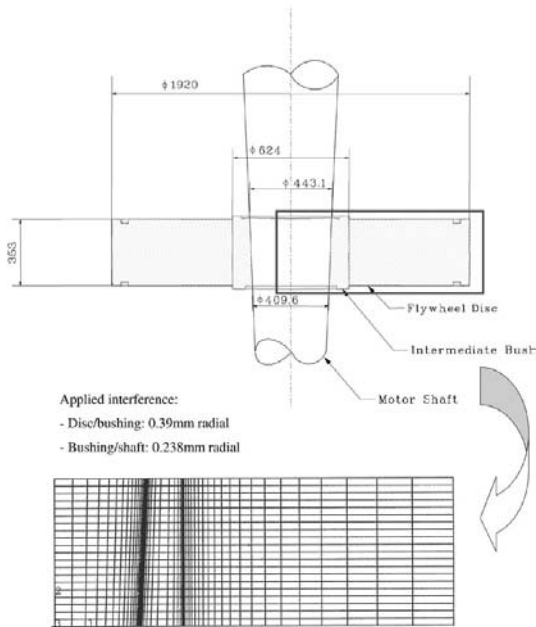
Physical configuration of interference-fit flywheel assembly for reactor coolant pump (Top) and FEA model for the flywheel assembly (Bottom)
